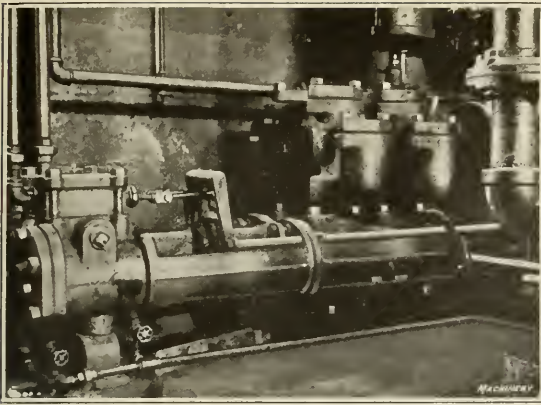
Old Steamboat Pump used in Pressure Feed System
